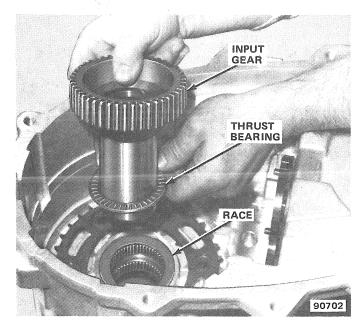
D-62 Input Gear and Thrust Bearing Removal/Installation
